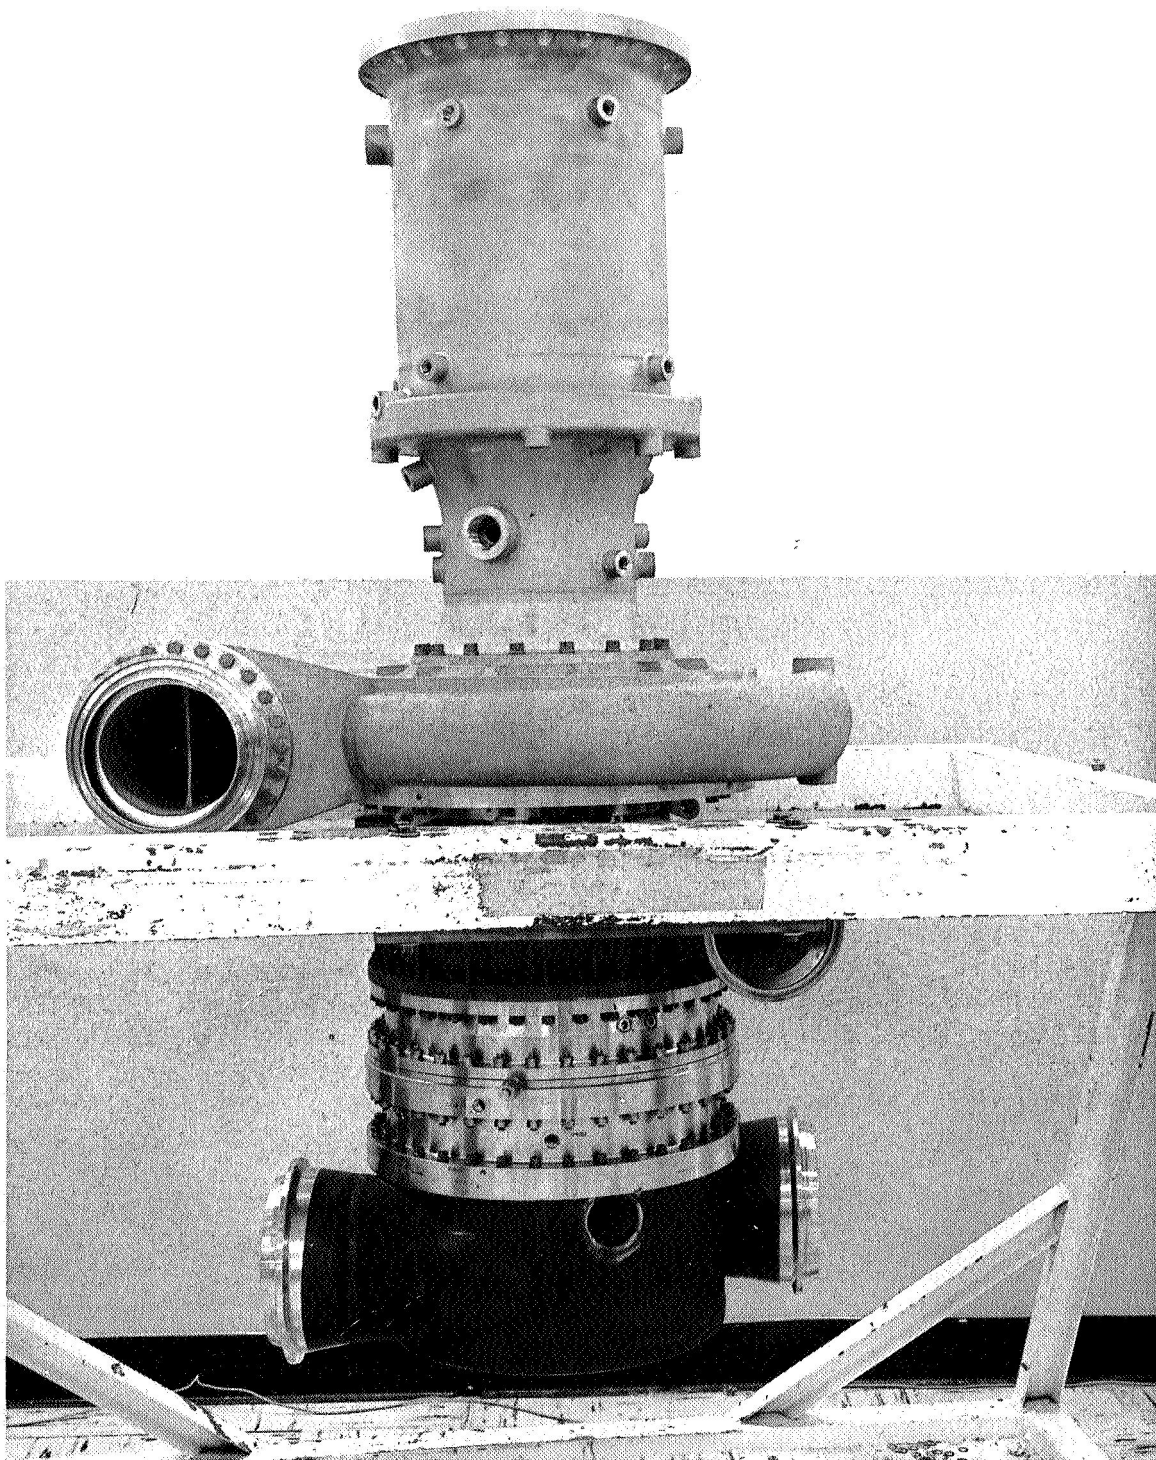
View of Turbopump Assembly in Build-Up Stand.
